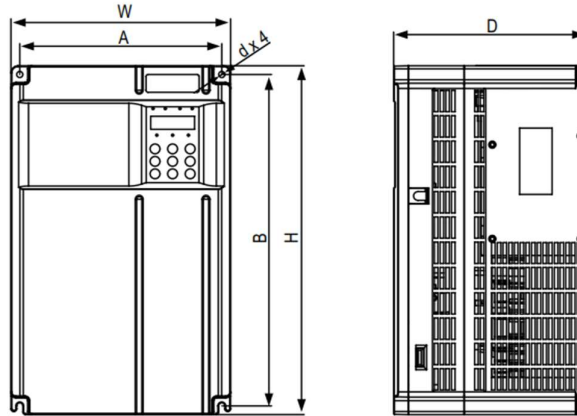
External dimensions and mounting dimensions of T5 to T6 frames models.
